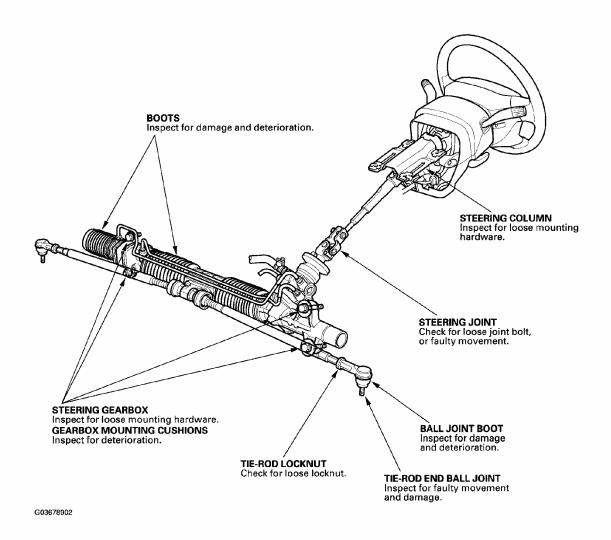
Identifying Steering Linkage And Gearbox Components Courtesy of AMERICAN HONDA MOTOR CO., INC.
